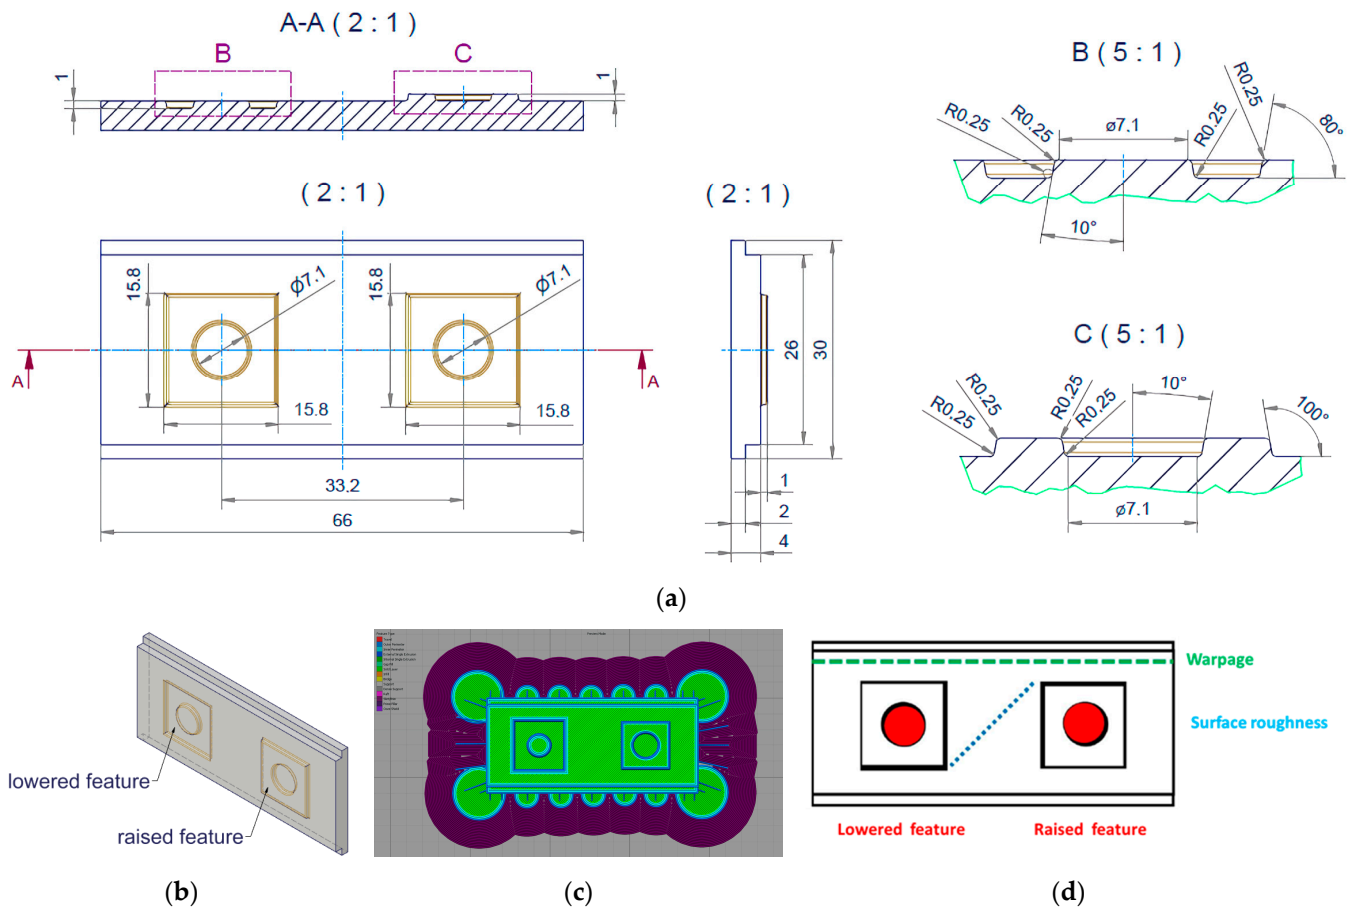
Mold insert type 2: (a): Engineering drawing with unit mm; (b) 3D view; (c) used STL File; (d): surface roughness and warpage measurement positions.
